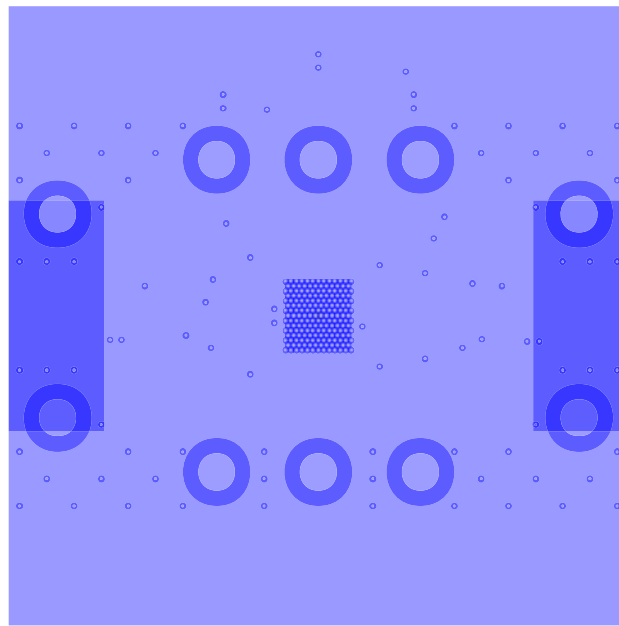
ADCA3270-EVALZ Assembly Drawing (Bottom Side, No Components)
